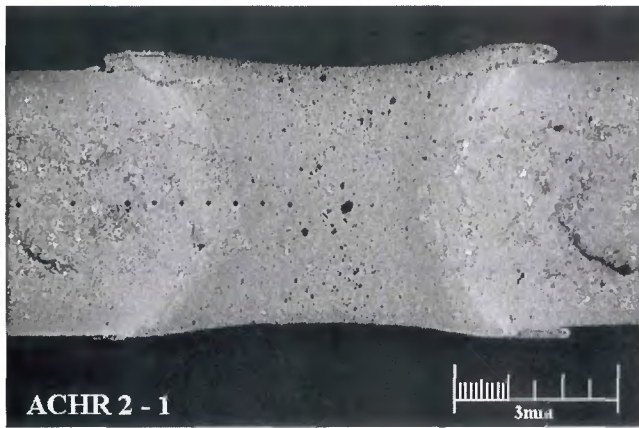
Cross section of a conductive heat seam weld made on 5-mm cast AZ91.
